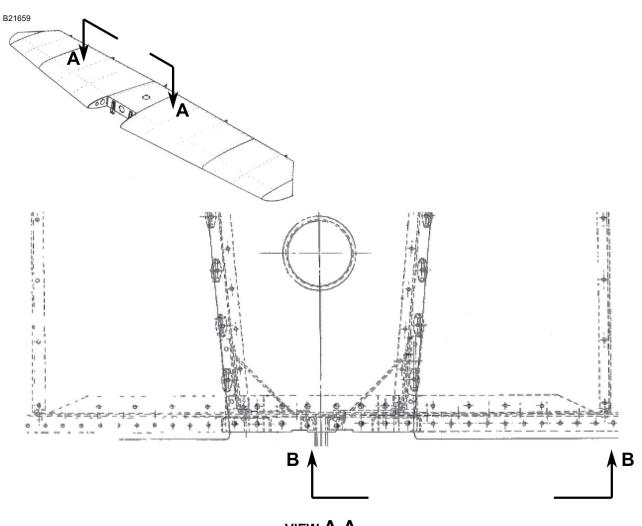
Horizontal Stabilizer Inspection (Sheet 1)
